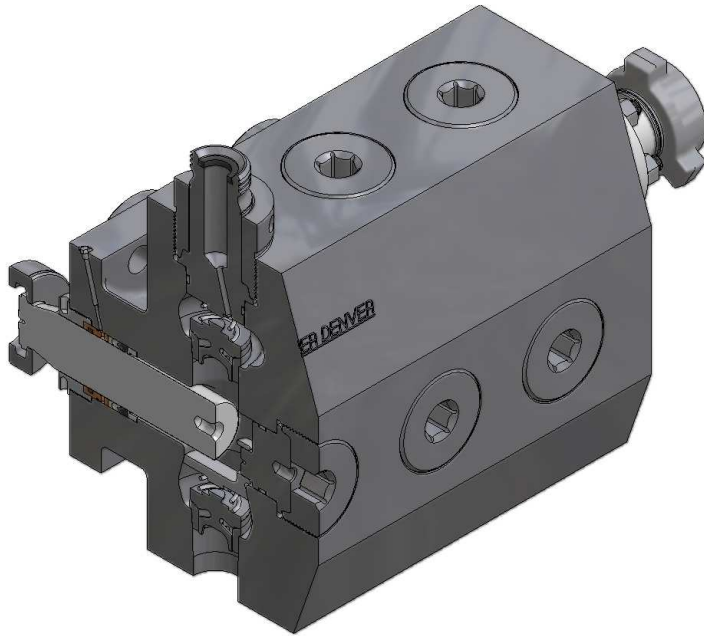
SUPER GWS FLUID CYLINDER SECTIONED ISO VIEW
